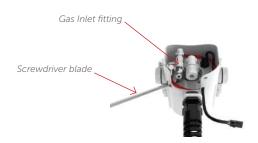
Using a screwdriver to remove the gas inlet fitting.
